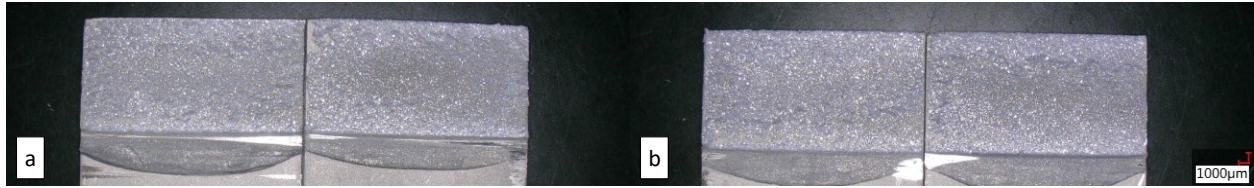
Fracture surface of single lap shear specimens of 6061-T6 aluminum adherends bonded with nominal bond line thickness of 0.3 mm (a), and 0.64 mm (b)
